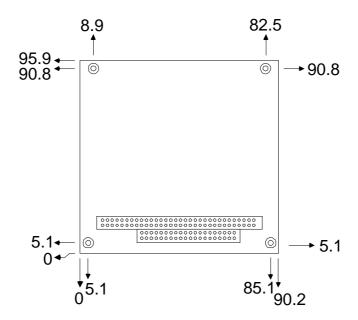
PC/104 Module Dimensions (mm) (± 0.1)
